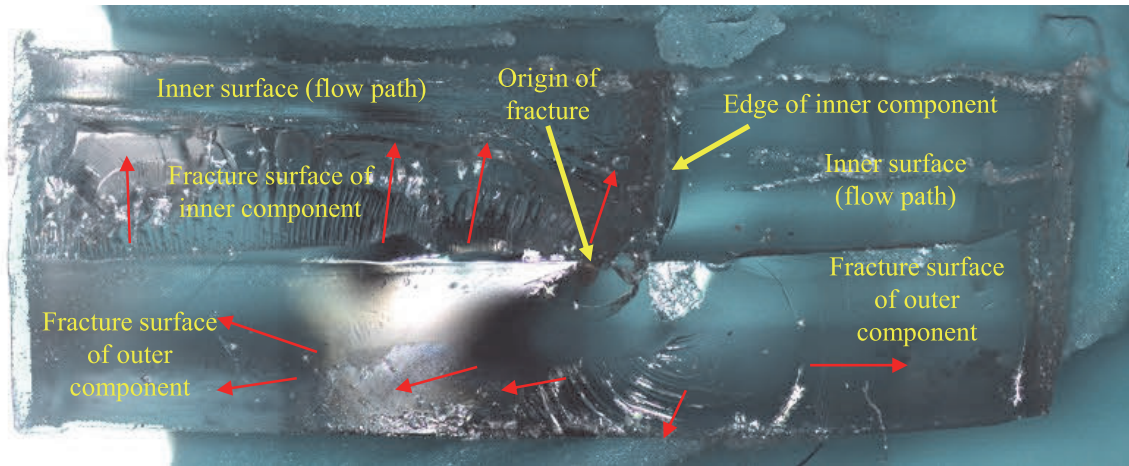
Fracture surface of product C fractured during clinical use
